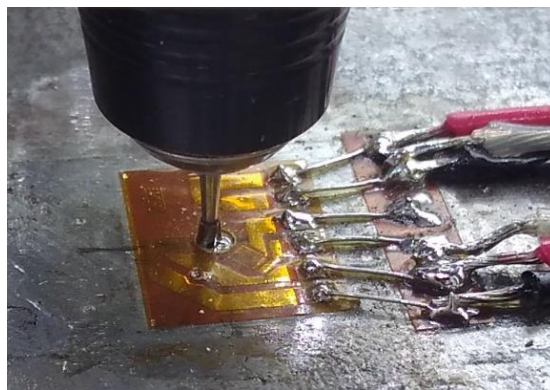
Hole-Drilling Method: Strain Gauge Rosette
